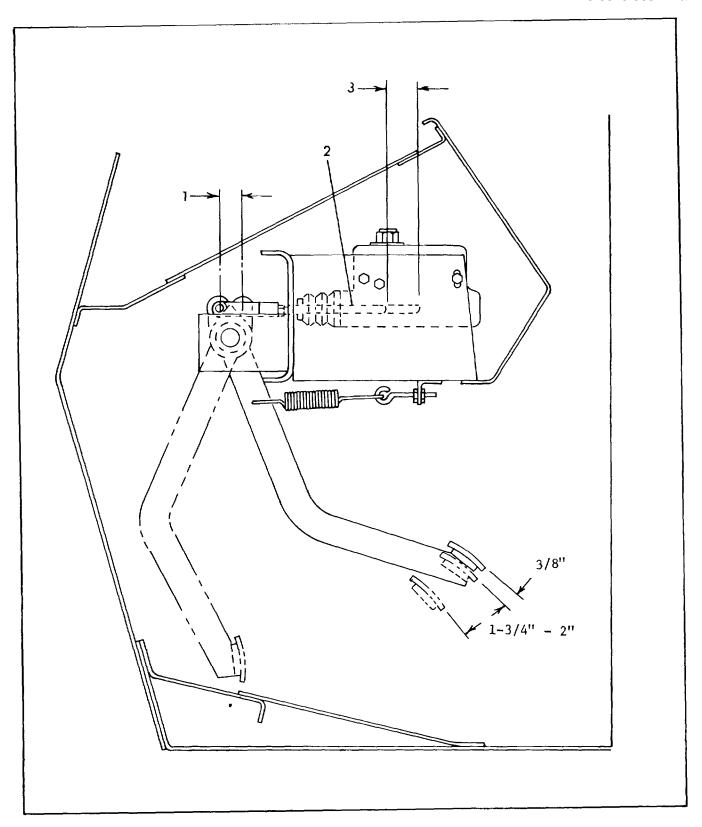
Clutch Adjustment. (Sheet 1 of 4) 4-222
